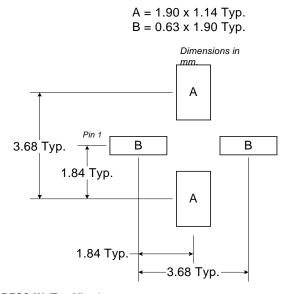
PCB Metal Land Pattern - RF204X (Top View)
